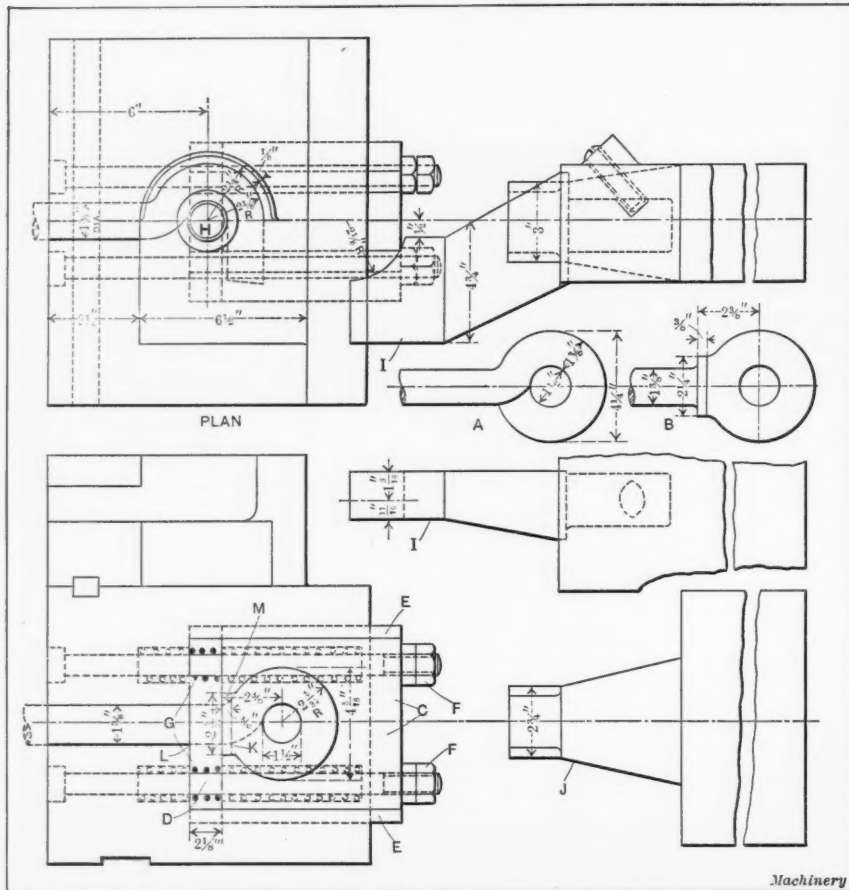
An Interesting Set of Dies and Tools used in a 3-inch Ajax Forging Machine for forming Eye-bolts in Two Blows
